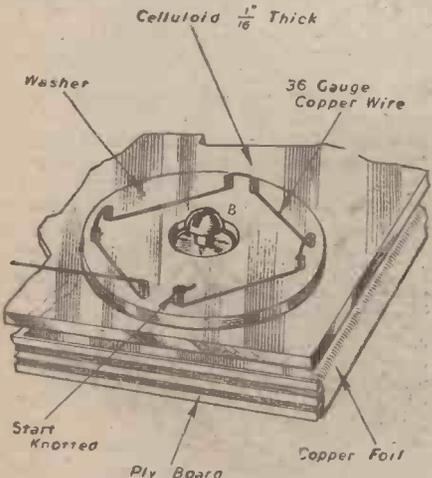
Enlarged view of a corner of the celluloid sheet drilled and wired. The wire is threaded through the eight No. 76 drill holes, as shown.
